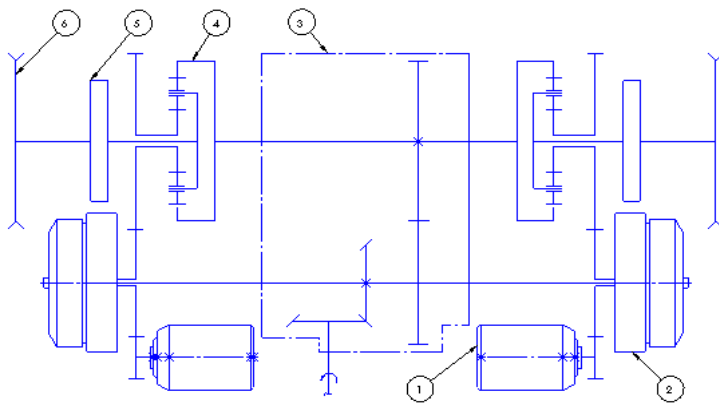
Kinematic diagram of transmission with two motors operating in braking mode, while maintaining the mechanical branch in TM: 1 – electric motors; 2 – regular TM; 3 – gearbox; 4 – summing planetary gear sets; 5 – final drives; 6 – driving wheels
